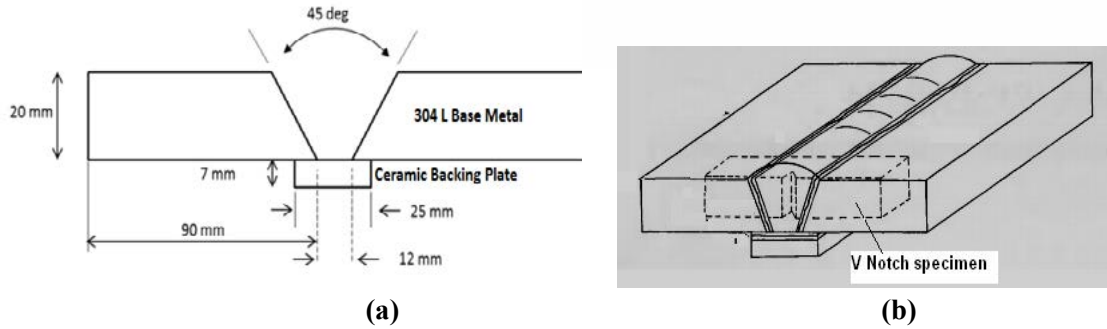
Groove weld test assembly (a). Charpy V-notch specimen (b).
